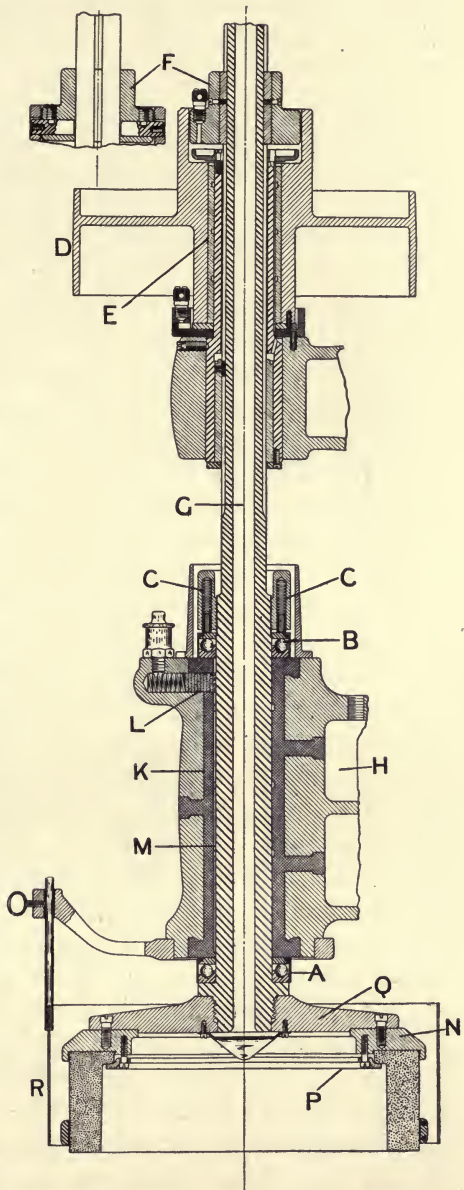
SPINDLE OF PRATT & WHITNEY VERTICAL SURFACE GRINDER
